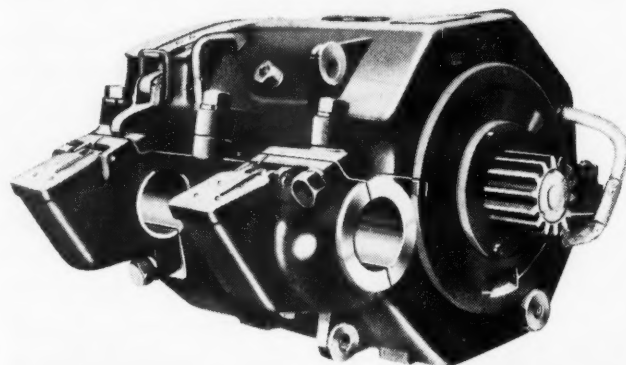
"SPLIT-TYPE" motor frame, showing separation line.
